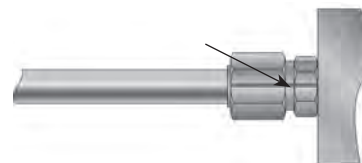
For initial assembly only, tighten by number of flats recommended in Table R23. Make a second reference mark on fitting body, lined up with mark on nut; 1 FFWR shown. See page R26 for reassembly procedure.
